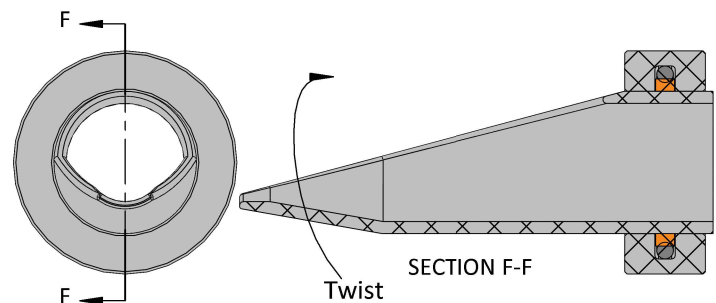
Start twisting and pushing rod resizing tool until PTFE seal is fully mounted onto mandrel. Remove tool, and the seal is ready for use.
